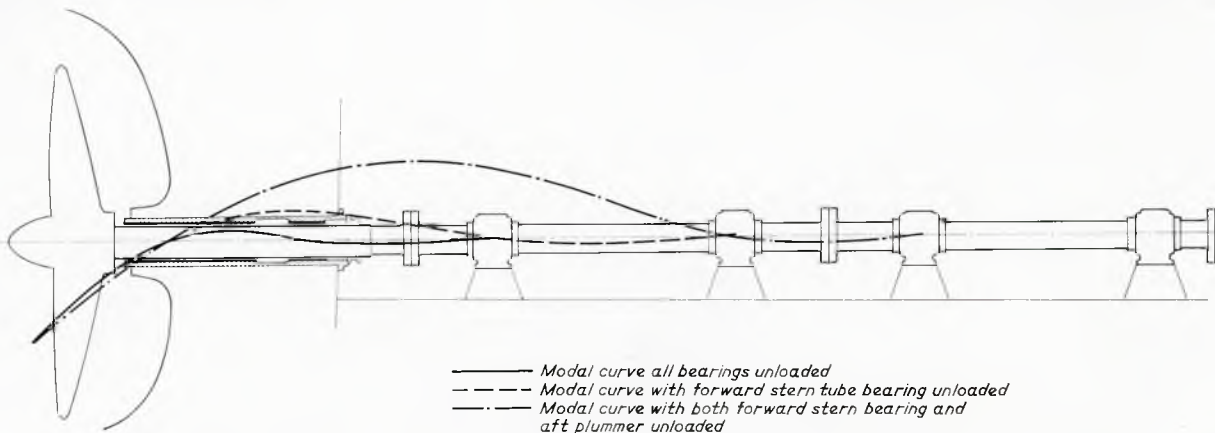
Conventional shaft arrangement for aft-engined oil tanker and depicting modal curves for lateral vibration
